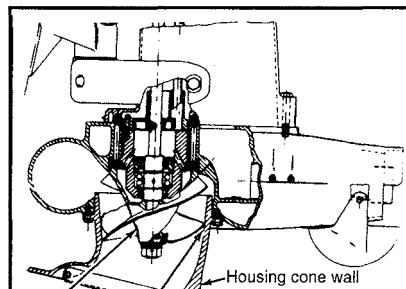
Jet drive impeller clearance is the gap between the edges of the impeller and its housing
